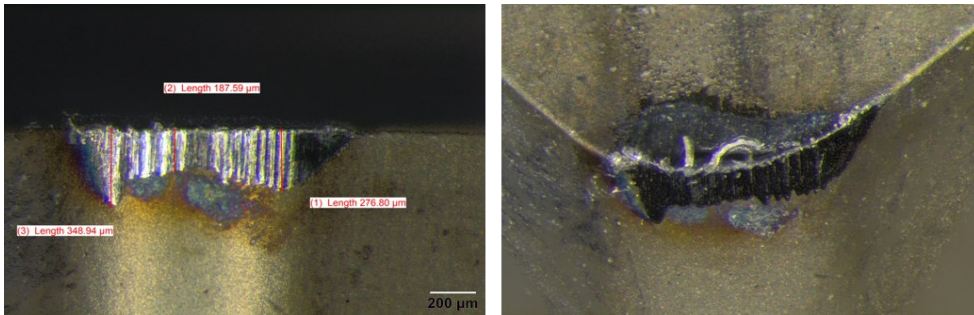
C4 flank (left) and flank+rake (right), machined at 60 m/min for 1.5 min in argon.
